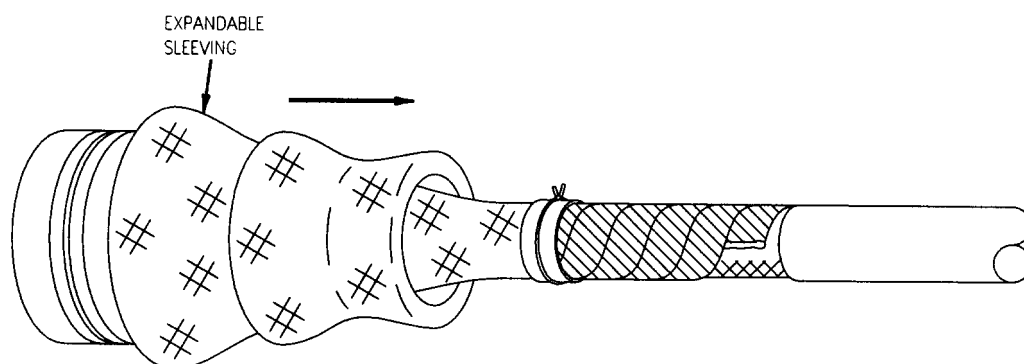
Folding Expandable Sleeving Onto Cable Assembly
